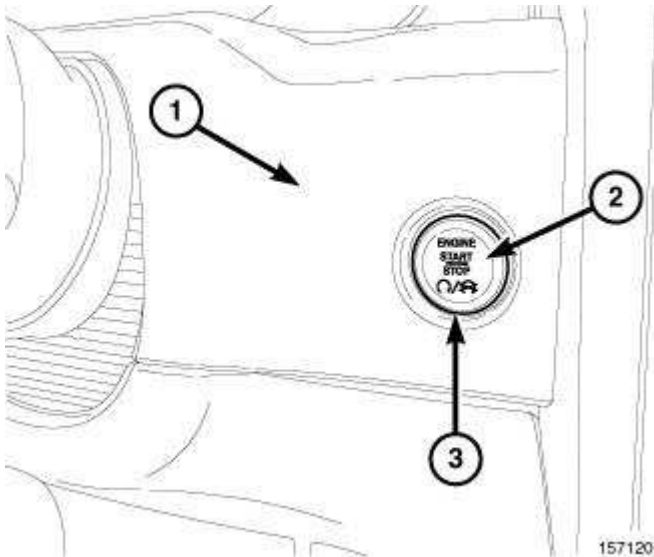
Identifying Instrument Panel, Button & Chrome Bezel Ring
